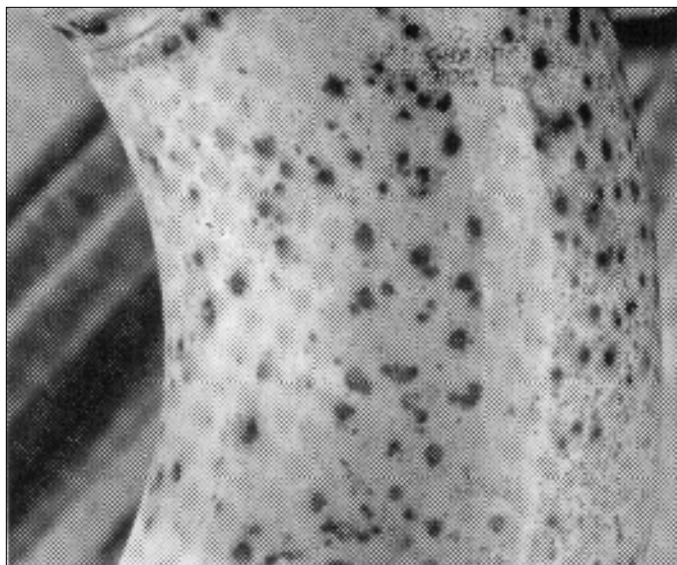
Iron embedded in stainless steel pipe from sandblasting of carbon steel structure overhead.
